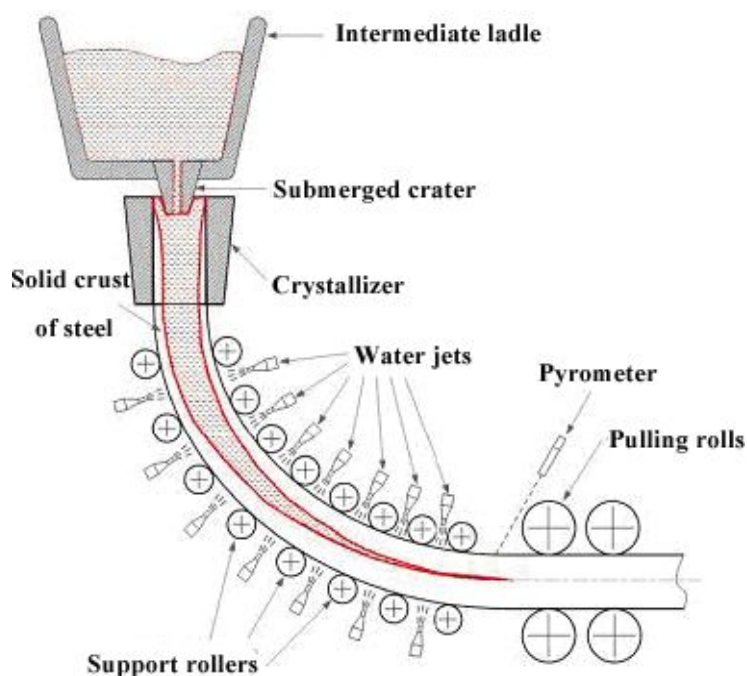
Scheme cooling the ingot in a continuous casting machine.
